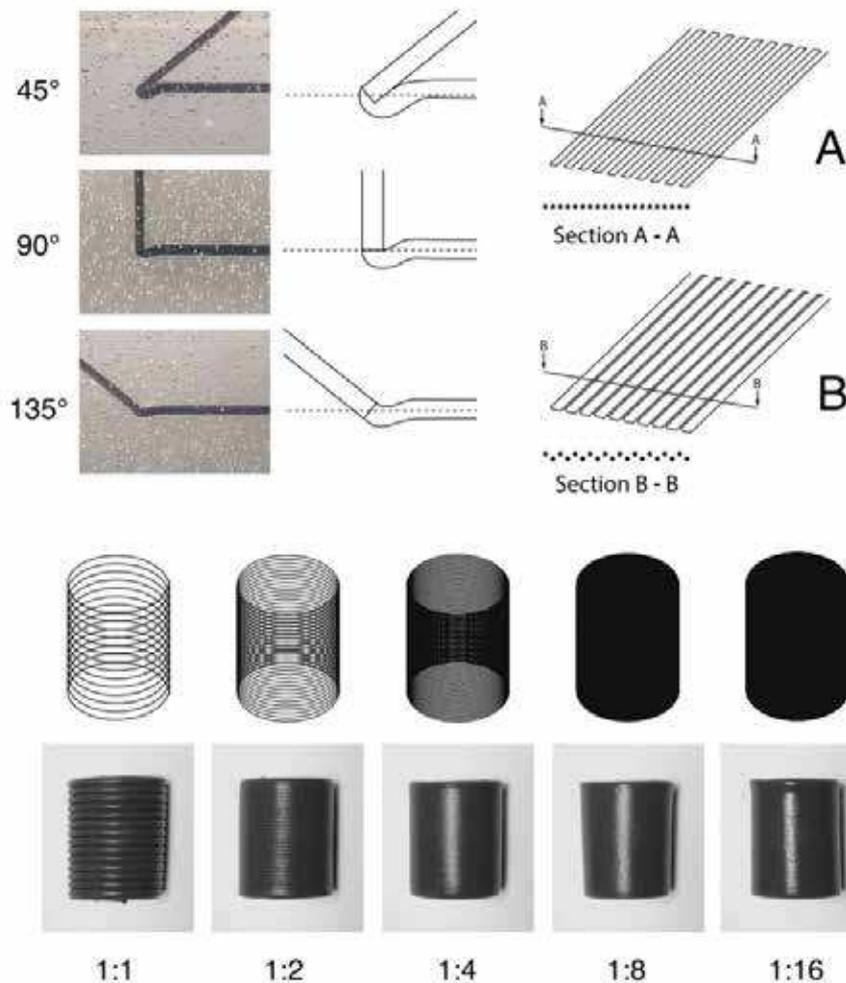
Top left: impact of the printhead to extrusion angle on centerline position; top right: print strategies for angled closed surface- A. unaltered toolpath, B. adapted toolpath; bottom left to right: impact of increasing stepover on surface finish.
